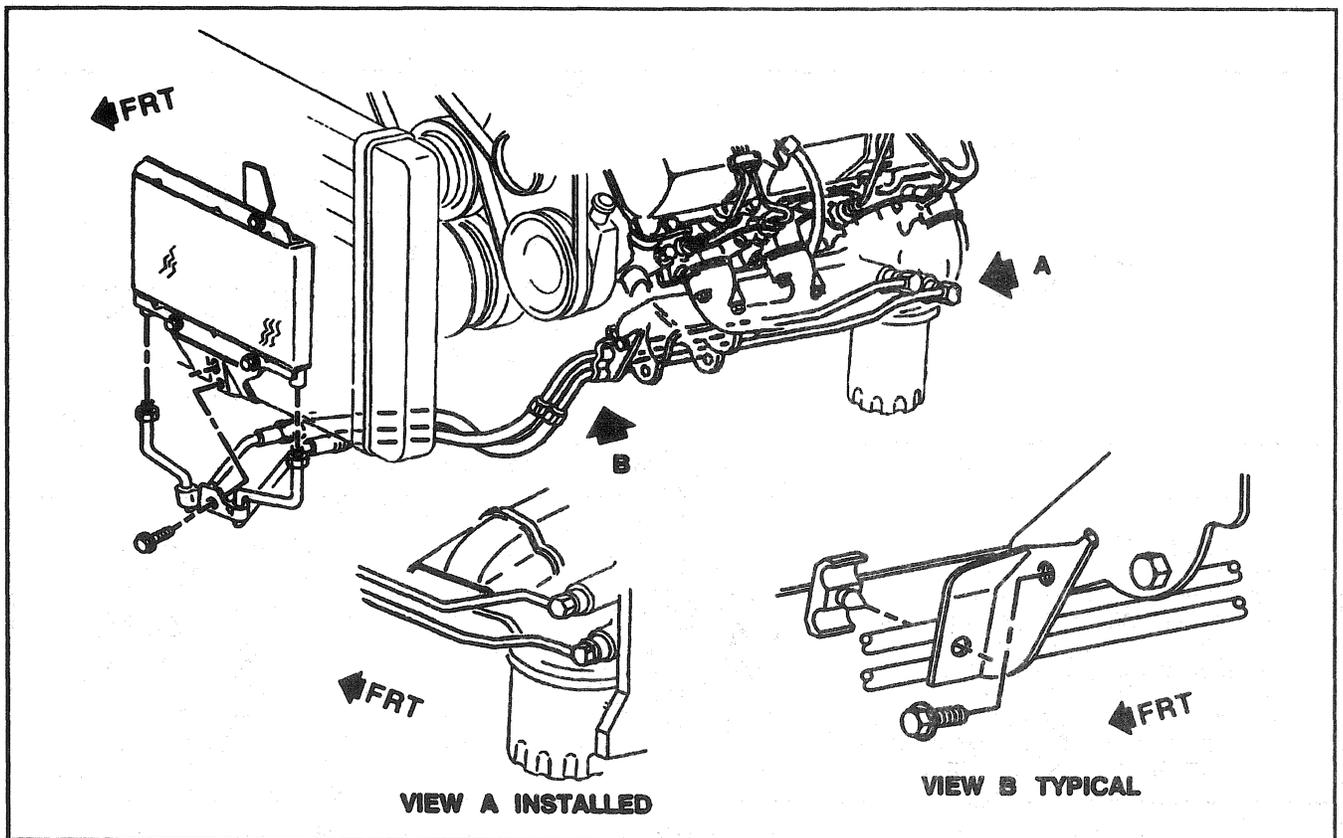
Engine Oil Cooler Lines and Components (Diesel)
